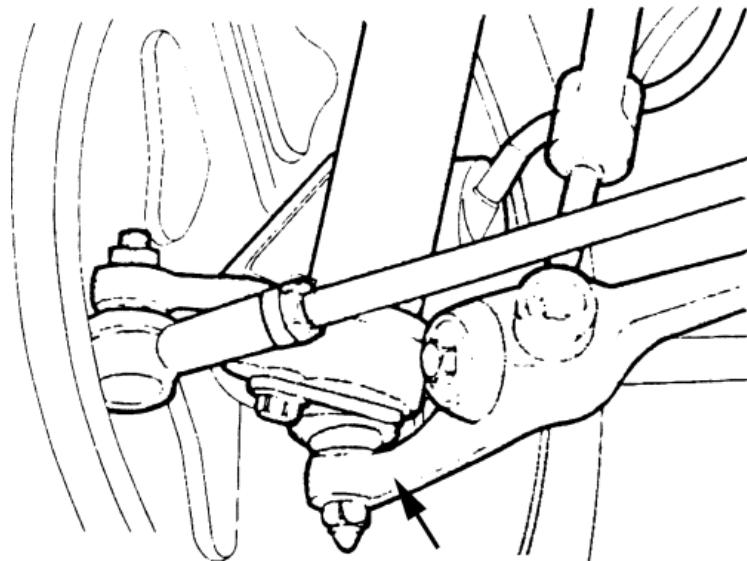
Ball joint assembly -900 series vehicles
